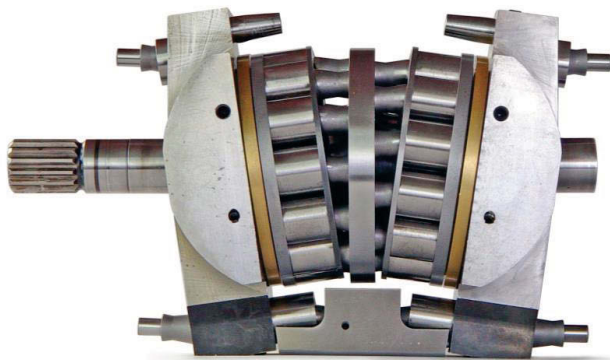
Inner parts of the FCVP28, excluding bias springs, bearings and shaft seal
